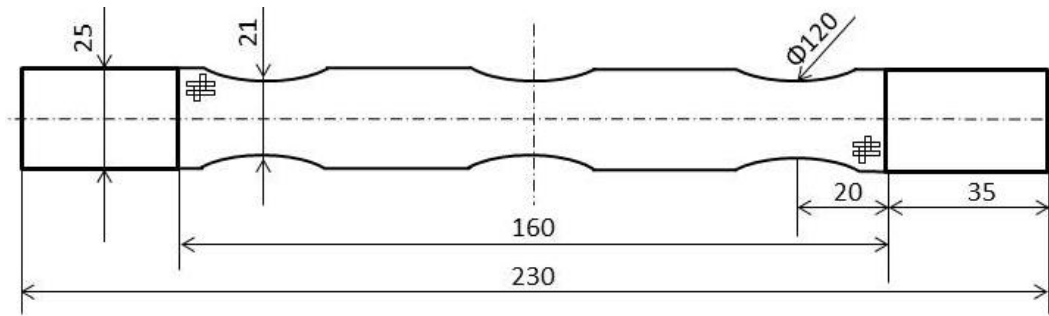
Dimension of 3-dumbbell shape specimens
